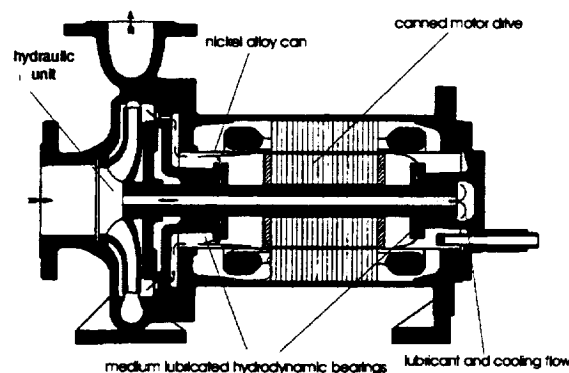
Cross section of a standard canned motor pump [Neum-94]
